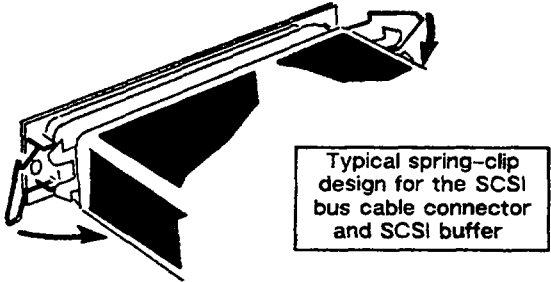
Latching the Spring Clips of the SCSI Bus Connector or SCSI Buffer
